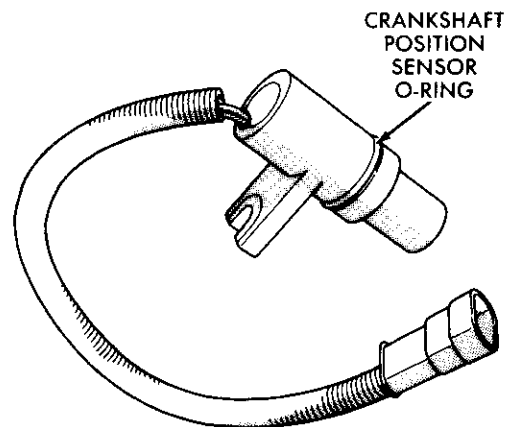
Sensor O-Ring—8.0L V-10 Engine
